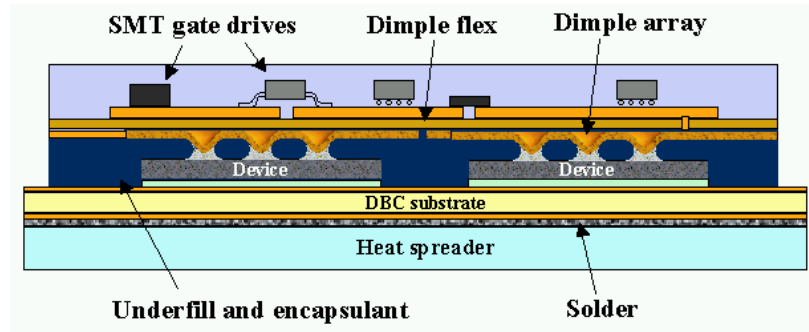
Underfilled power device with Dimple Array interconnects.
